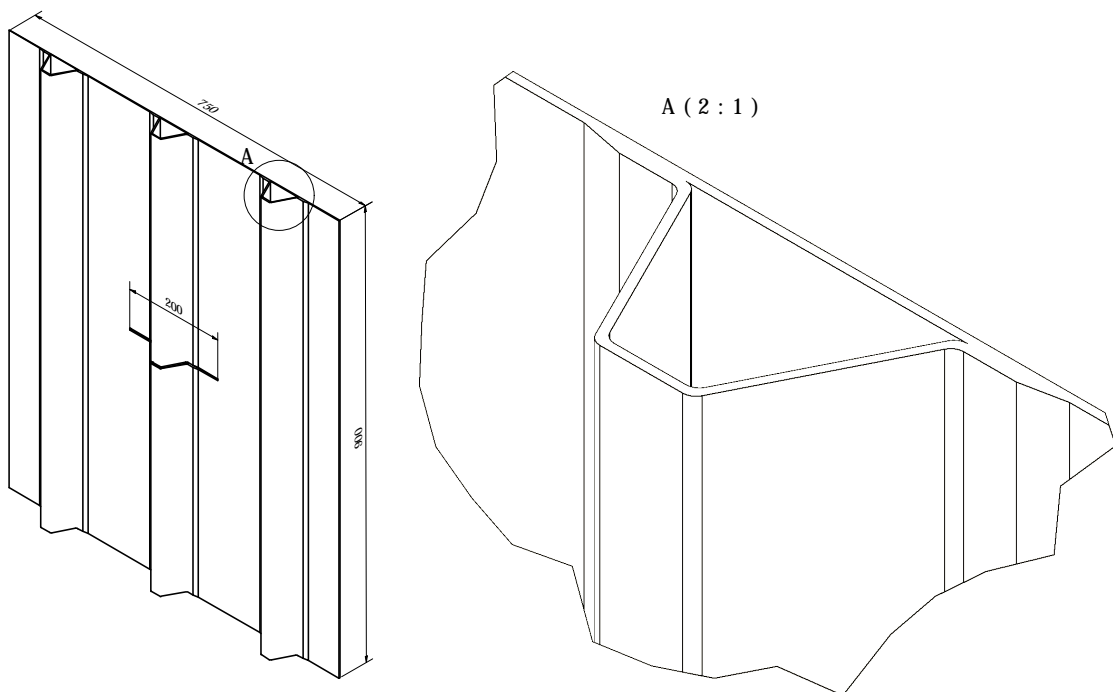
Overall impression of the large stiffened panel with three hat-shaped stringers co-cured to one side of the specimen, and a detailed view of the cross-section of the stringer. All dimensions in mm.
